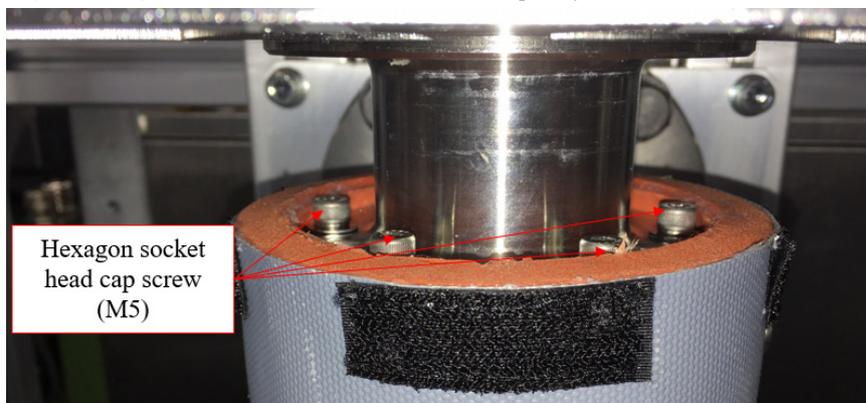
Remove the hexagon socket head cap screws (M5, 6) with a 4mm hexagon wrench.
